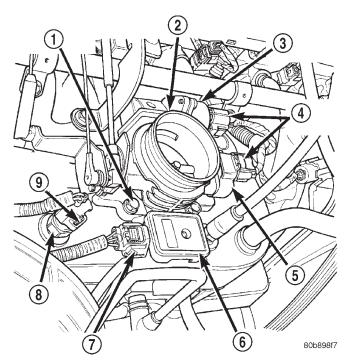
Throttle Body and Sensor Locations—4.0L Engine
